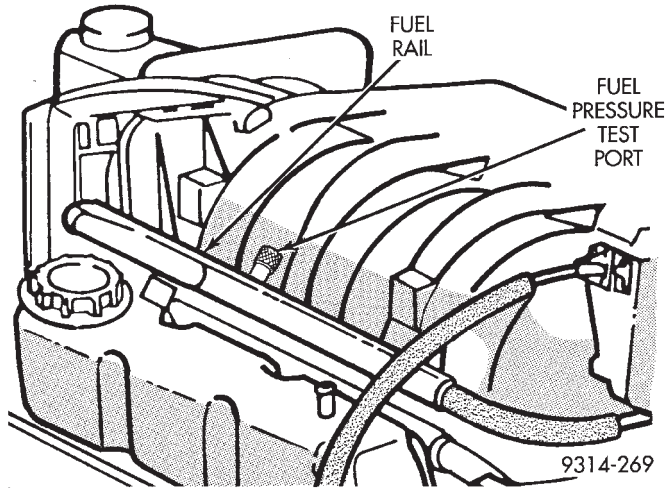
Fuel Pressure Test Port—3.3/3.8L
